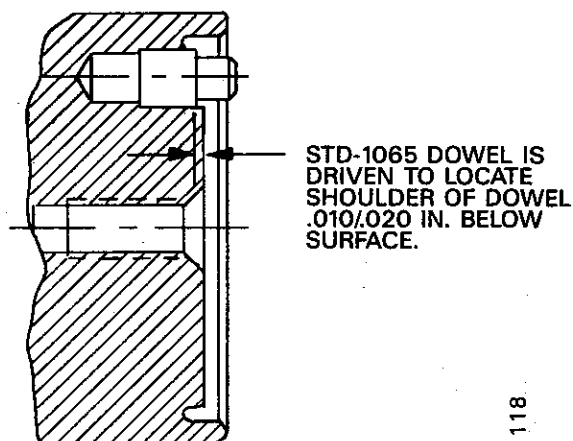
B. Section Thru End of Crankshaft Showing Driven Height of STD-1065 Dowel
